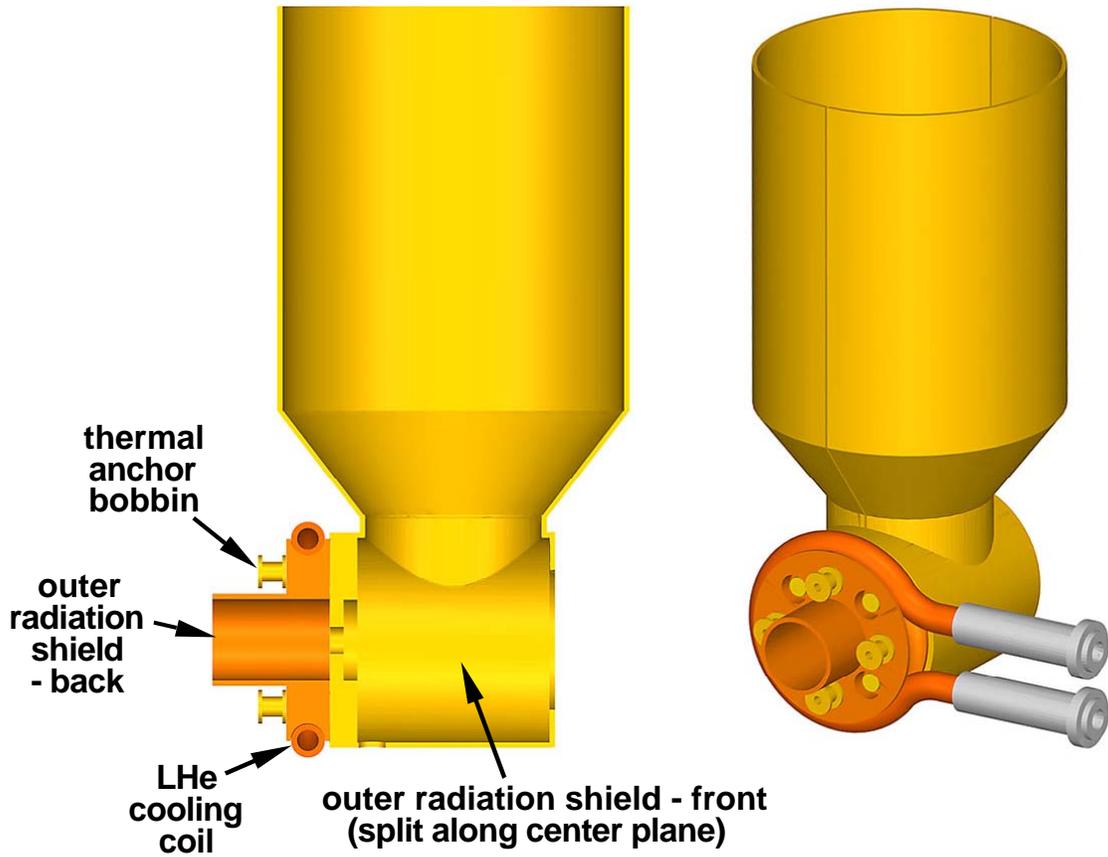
Outer radiation shield – Left: cross section; Right: full assembly.
